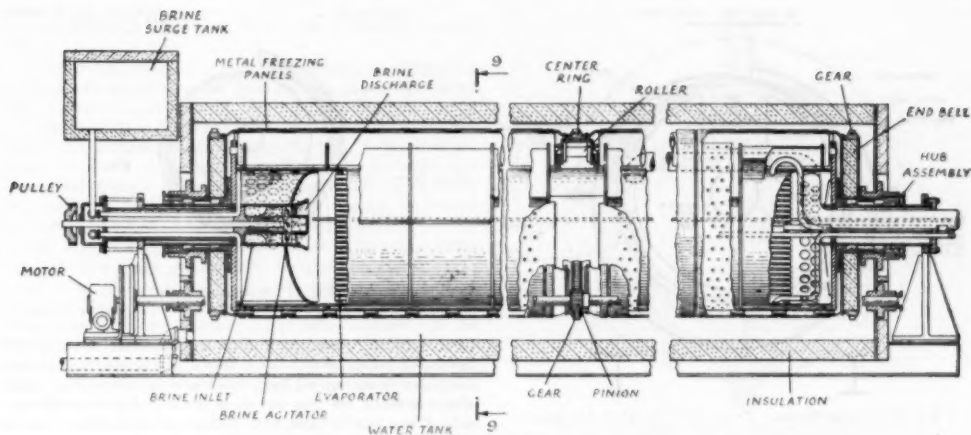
ONE TYPE OF MACHINE FOR MANUFACTURING SUBCOOLED FLAKE ICE FROZEN WATER RIBBONS
